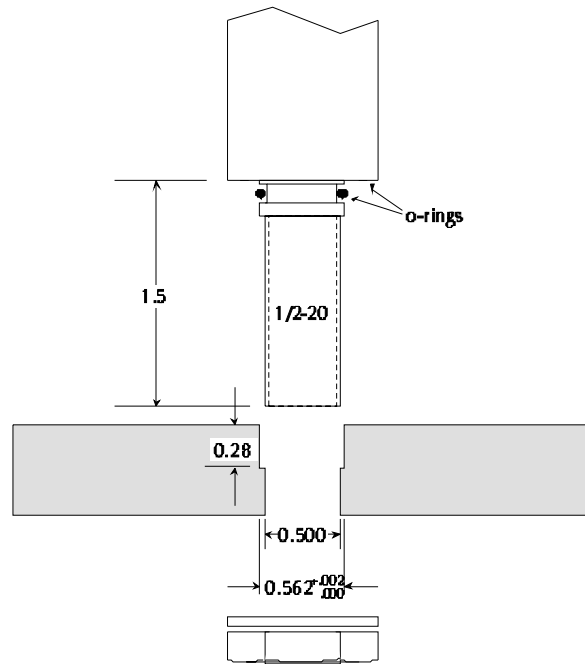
DRAWING OF BULKHEAD SENSOR and customer housing.
